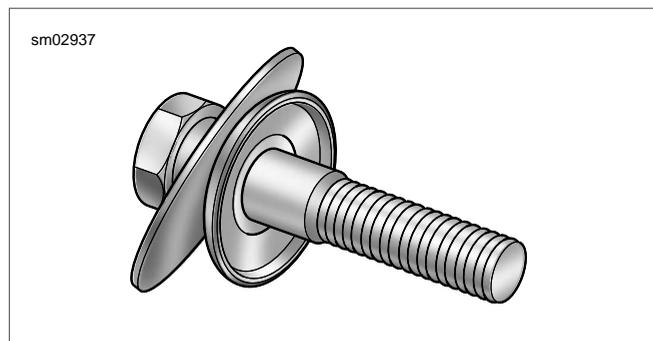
Remove Bolt, Large Washer, and Lower Cup Washer (Right Side)
